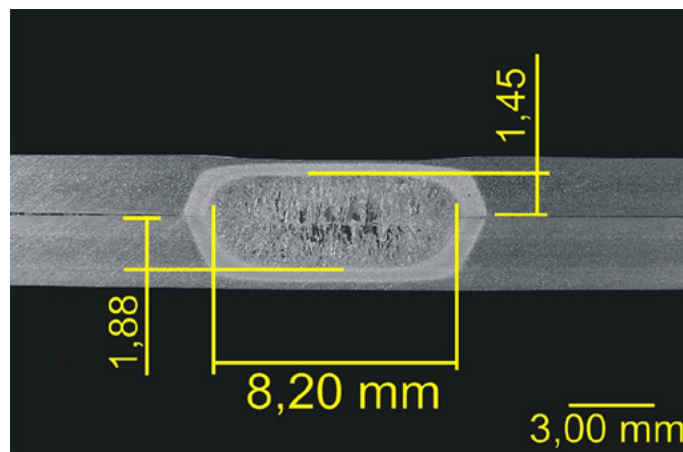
Testing the depth of weld nugget penetration in material: steel X2CrNi12, the thickness of sheets being joined: 2.0 + 2.5 mm. Etchant: Adler.
